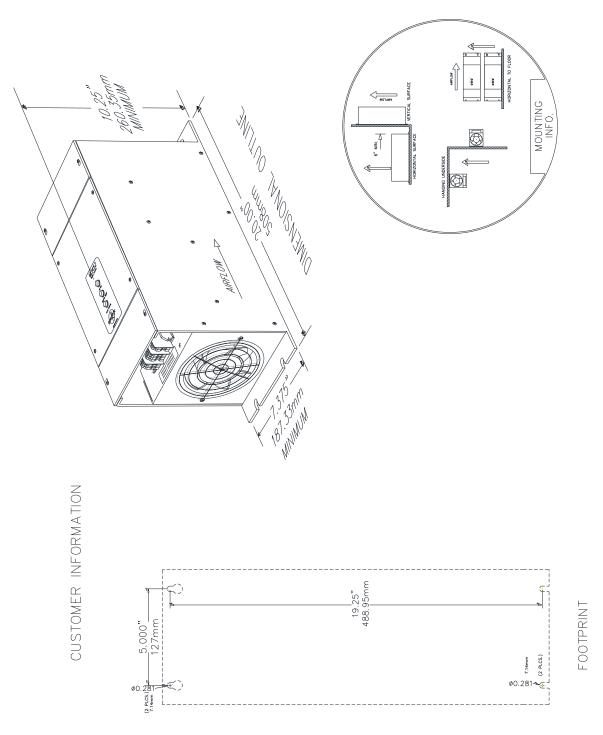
M3452 K6 Chassis Dimensional Outline Drawing
